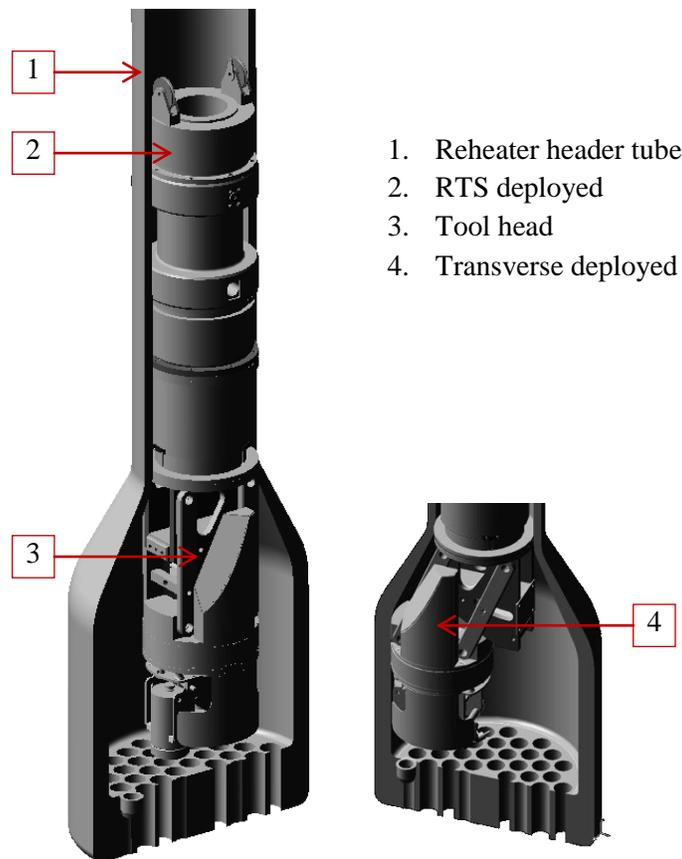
Sections showing Tool Head before (left) & after deployment (right)
